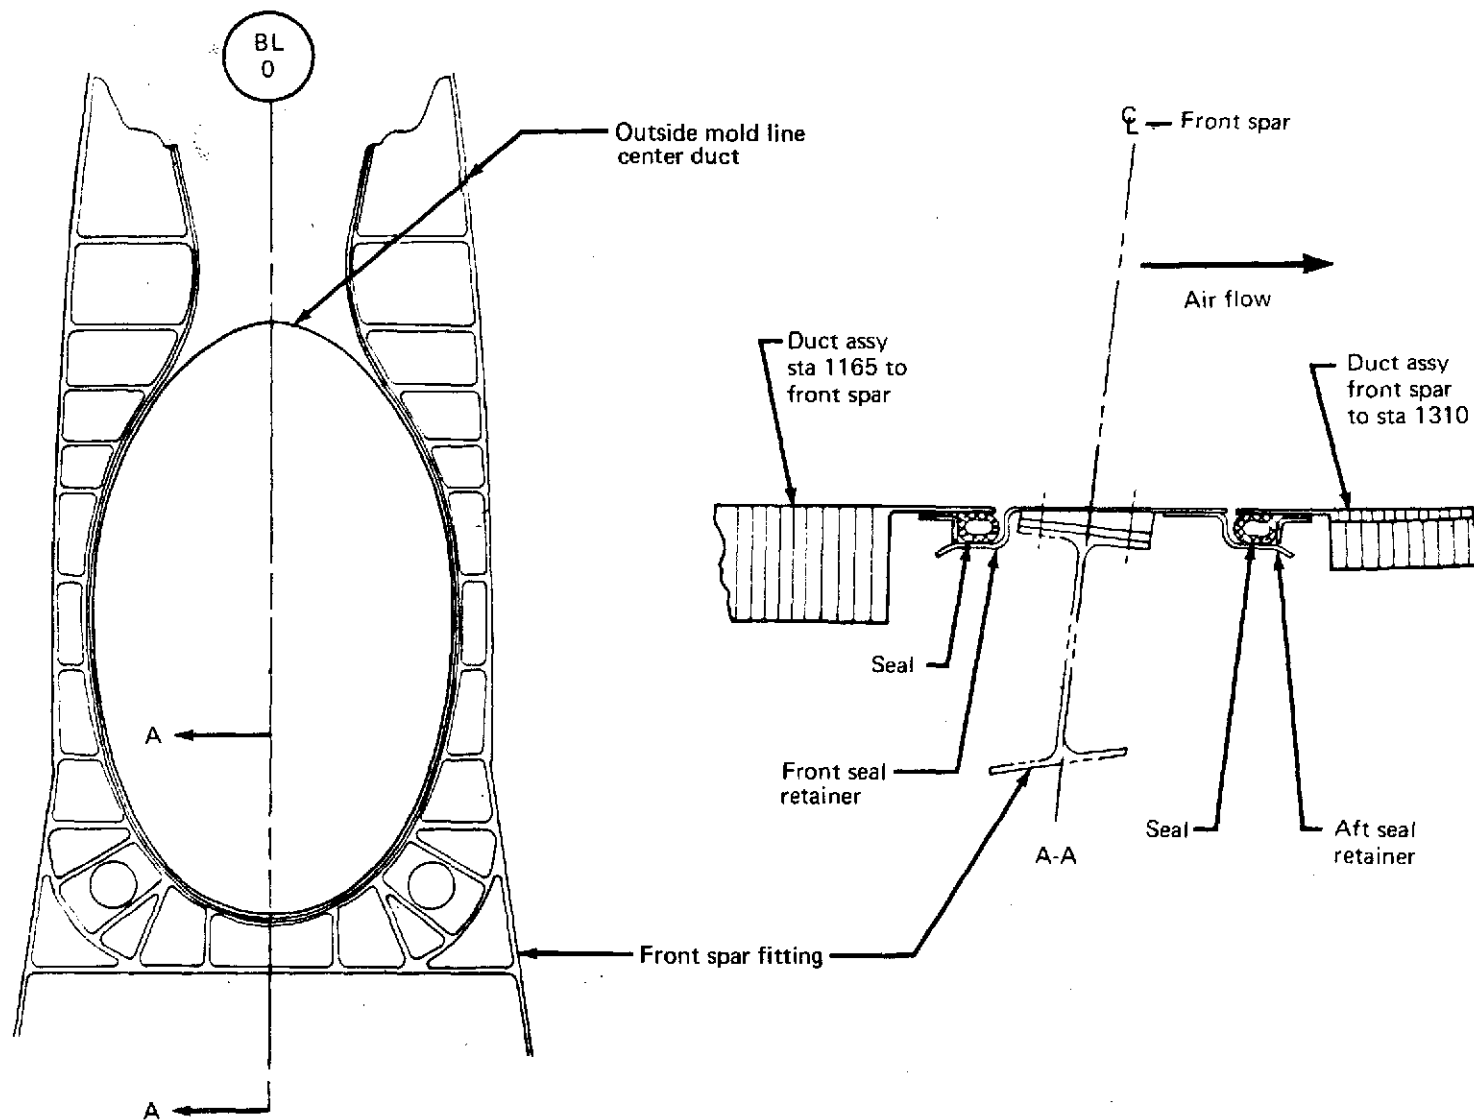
727/JT8D CENTER-DUCT SEAL AT FIN FRONT SPAR
